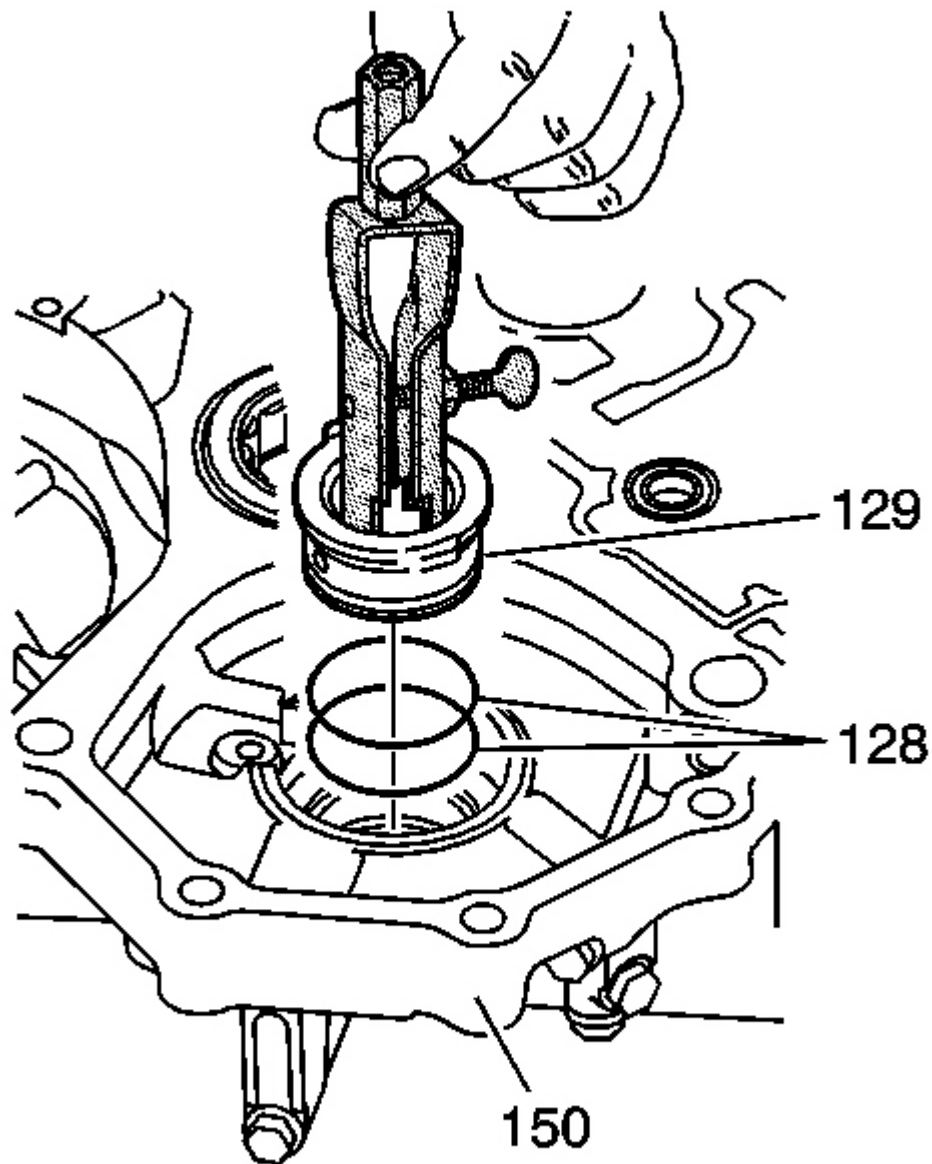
Removing 1St/2Nd Clutch Shaft Lube Feed Collar From Torque Converter Housing Using J 29369-1
